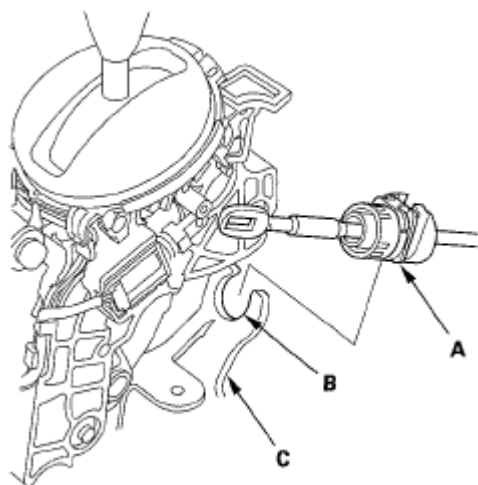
Identifying Socket Holder And Socket Holder Bracket With Slot
